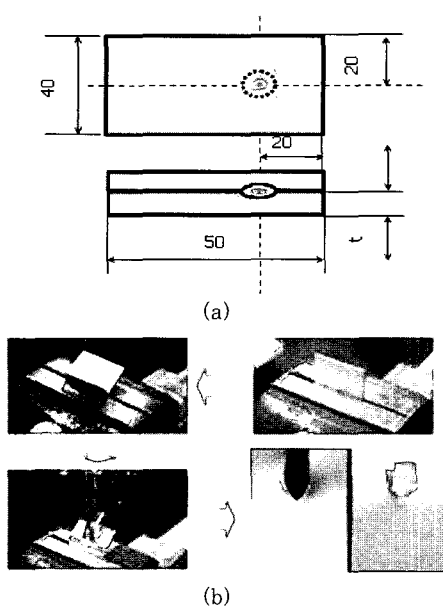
Schematic drawings of specimen for peel test (a) and test method (b)
